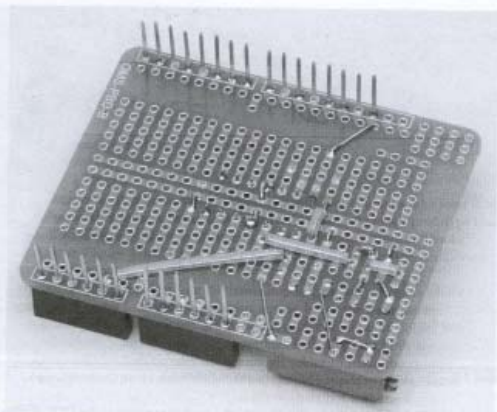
Bottom view showing wiring of general purpose panel meter shield.
